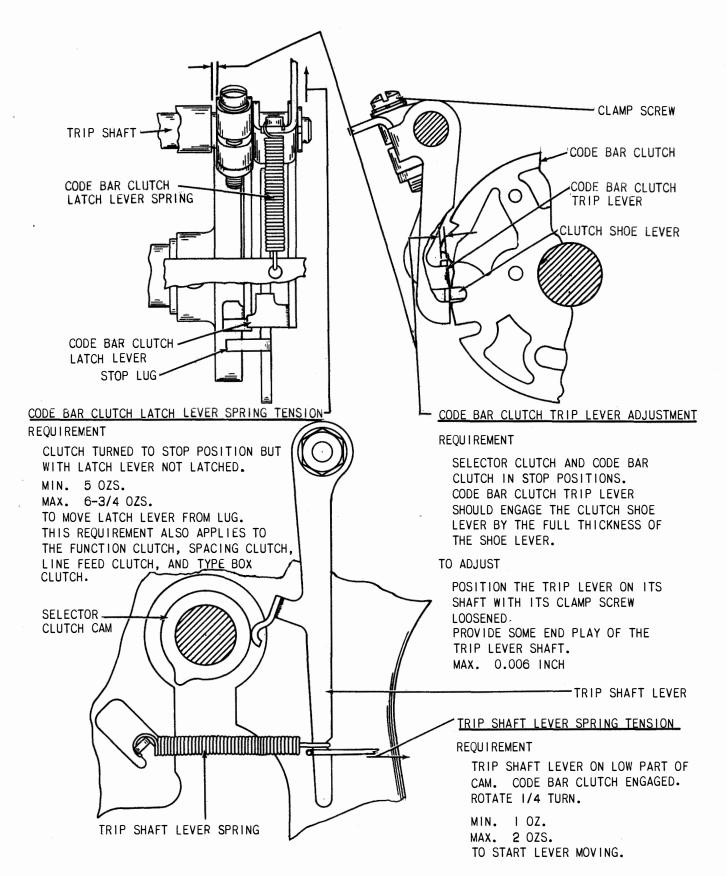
Automatic Typer, Code Bar Clutch Trip Shaft Mechanism
